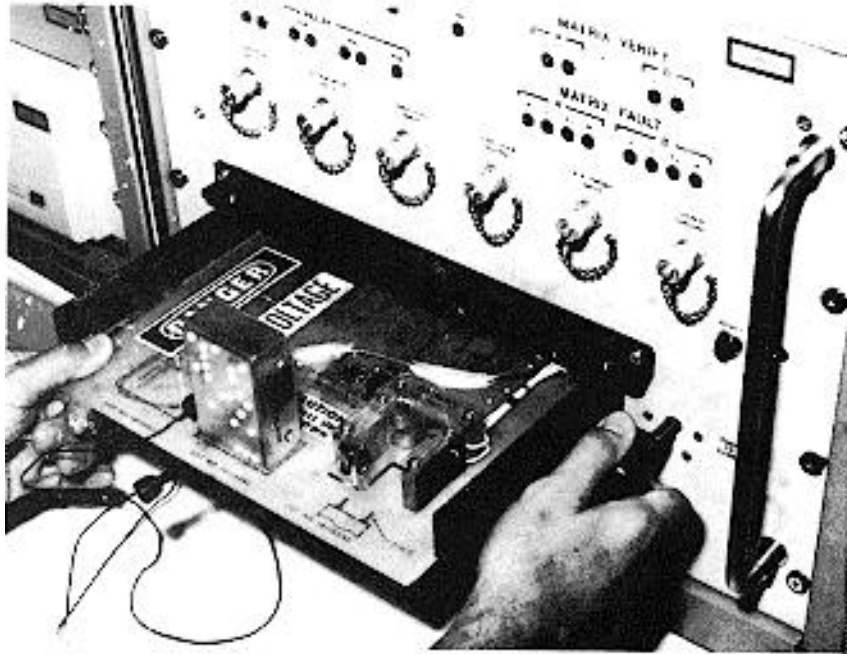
Inserting IAB/PCB/Module in ZIF Connector
